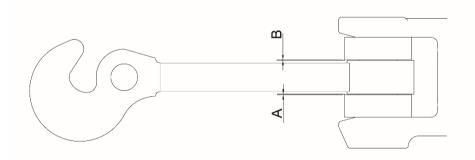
Spacers / adapters together with a EN 15566:2022 hook in a DAC draft gear
